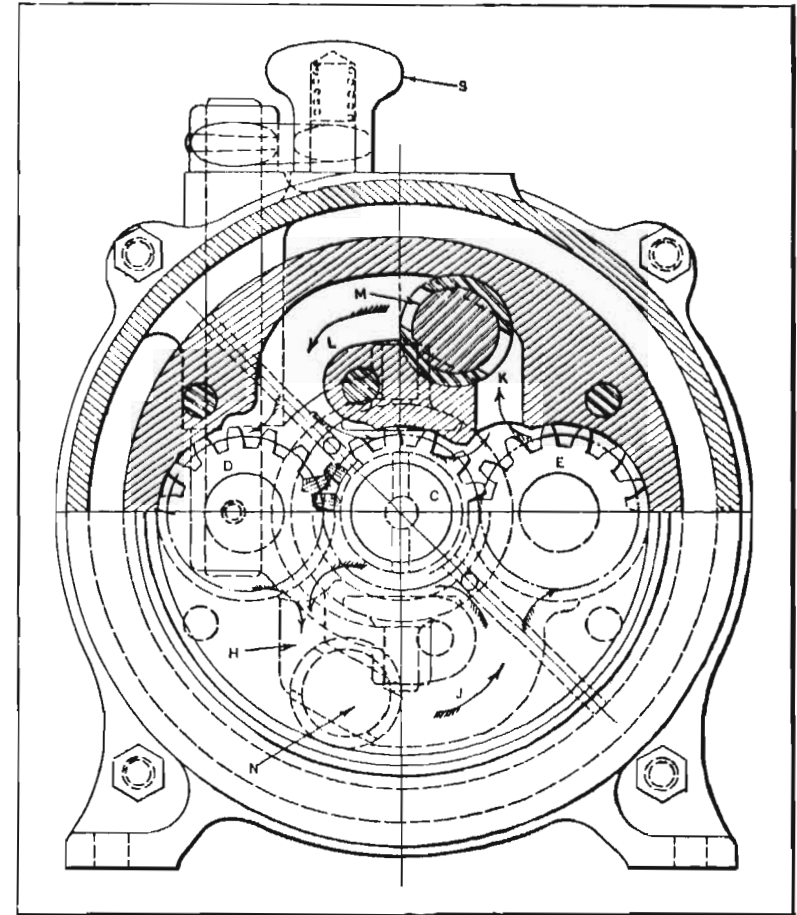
Cross-section, Showing Gears and Control Valves of Hydraulic Transmission
